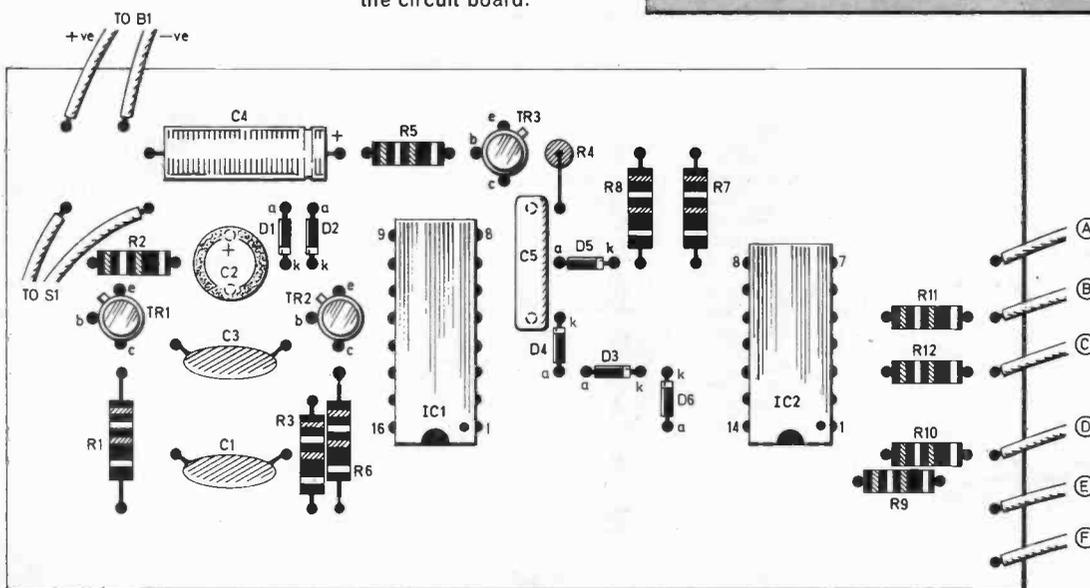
Layout of components on the topside of the p.c.b. It is advisable to use i.c. sockets for mounting IC1 and IC2.
